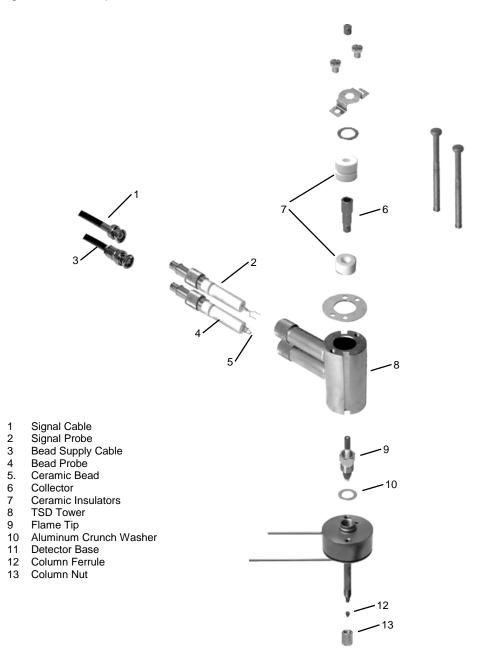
is an exploded view of the TSD. GC covers should be removed.
